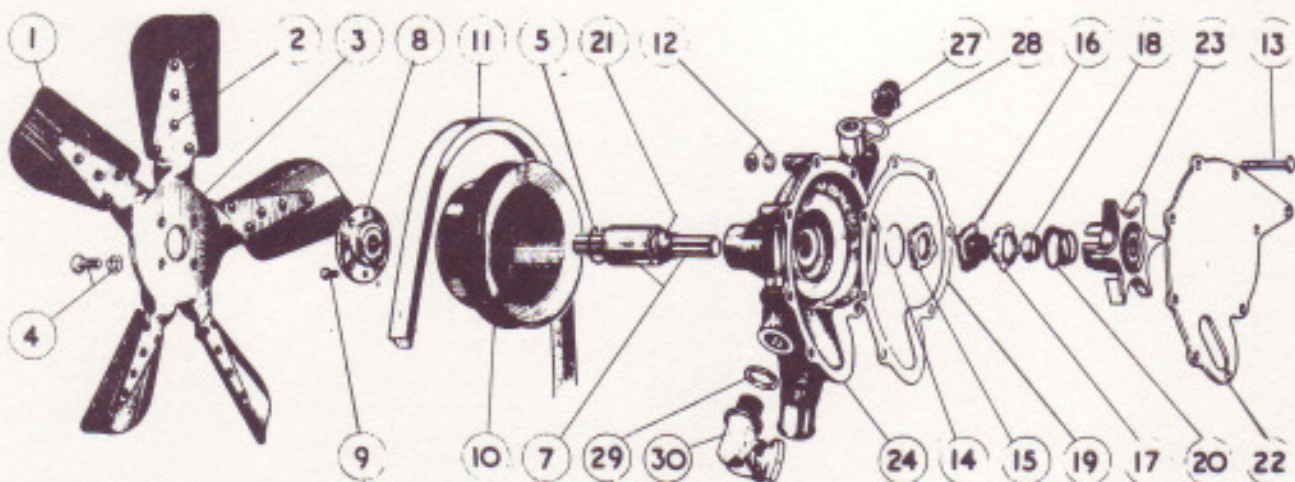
"EXPLODED" VIEW OF COOLANT PUMP. (SEE NOTATION LIST FOR FIG. 5.)
